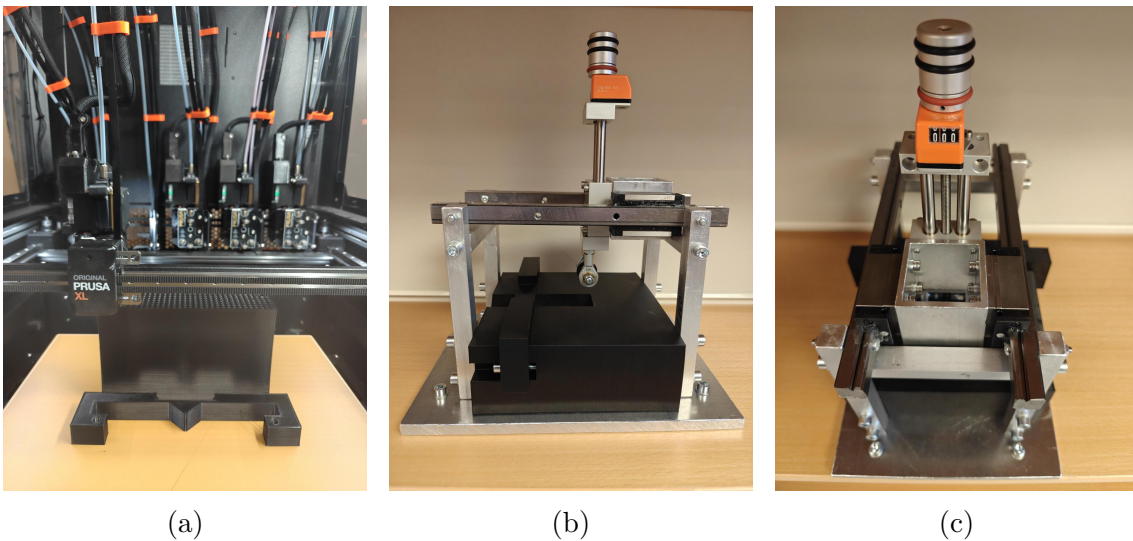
(a) Fabrication of a tool component using a 3D printer; (b) side view of the fully assembled in-house developed tool; and (c) positioning table in its initial position, with the display visible.
